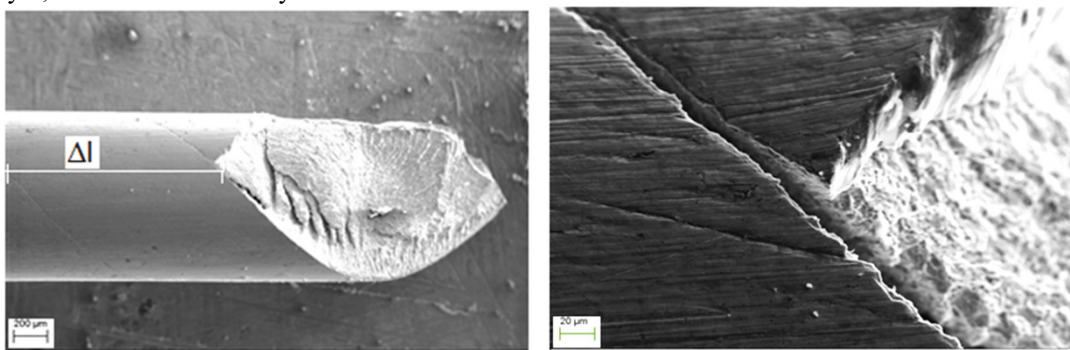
SEM images of fracture surfaces of the hydrogenated TiNi specimens. Δl is the distance between spiral cracks on the wire surface.
